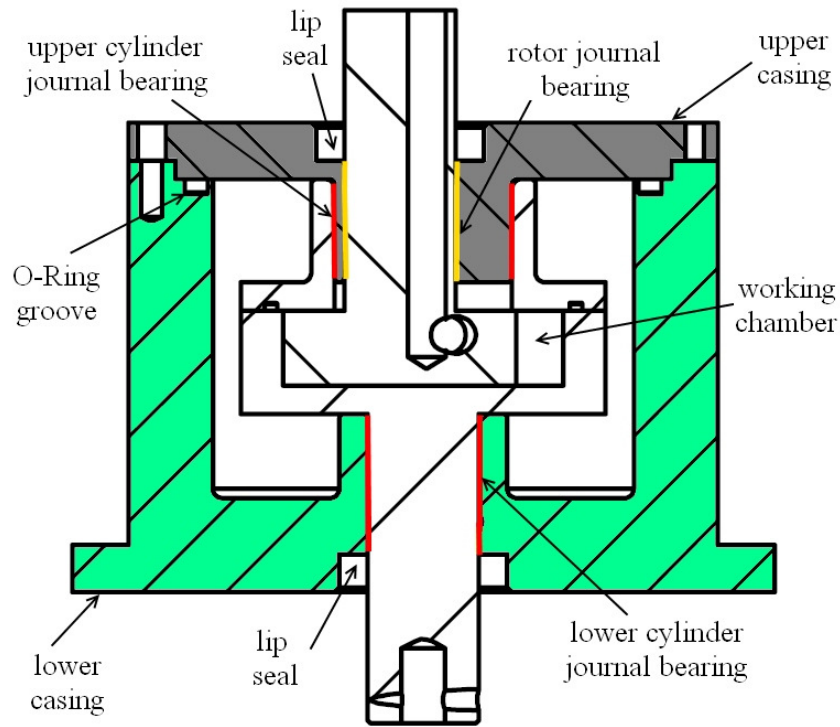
Journal bearing arrangement of the revolving vane compressor prototype
